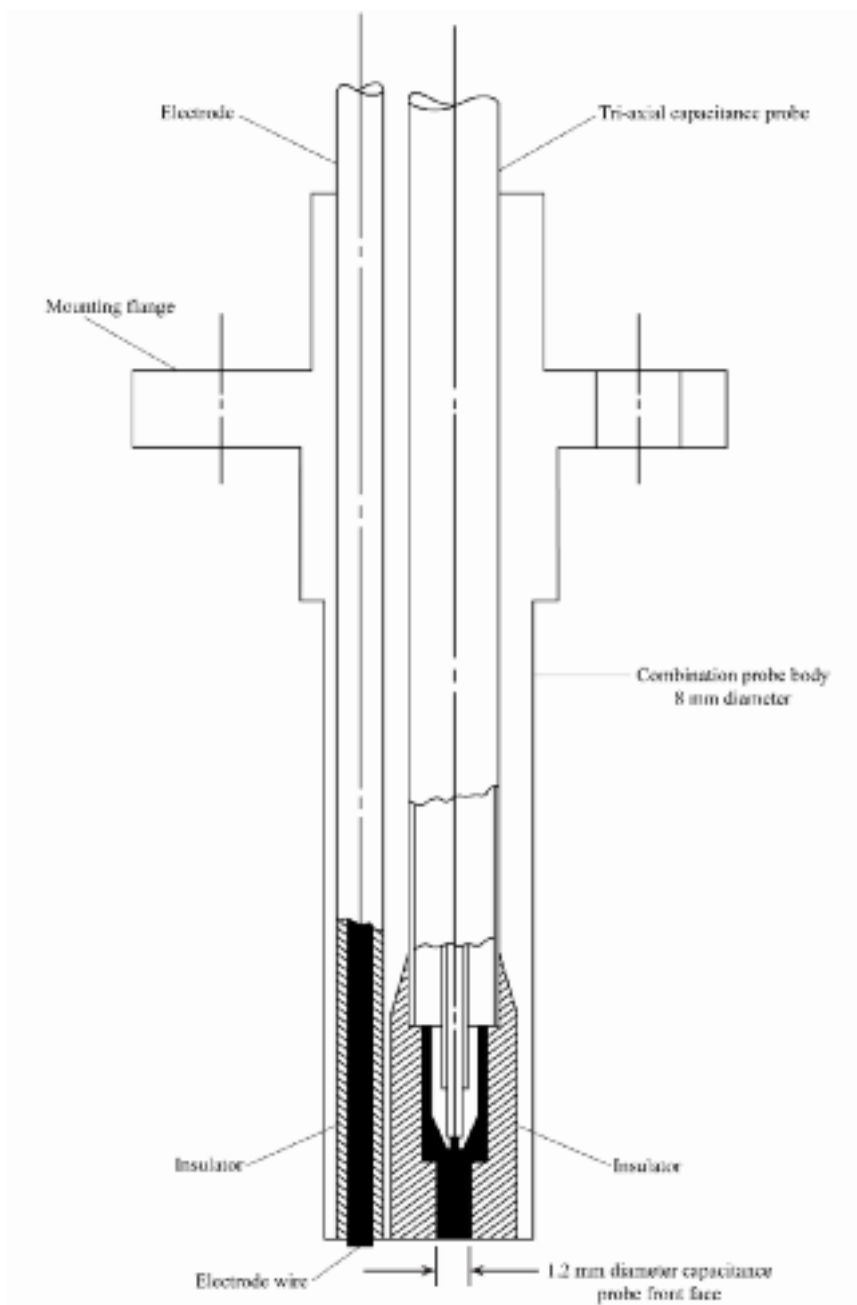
The 8 mm integrated probe with the adjustable electrode used in the prototype measurement head.
